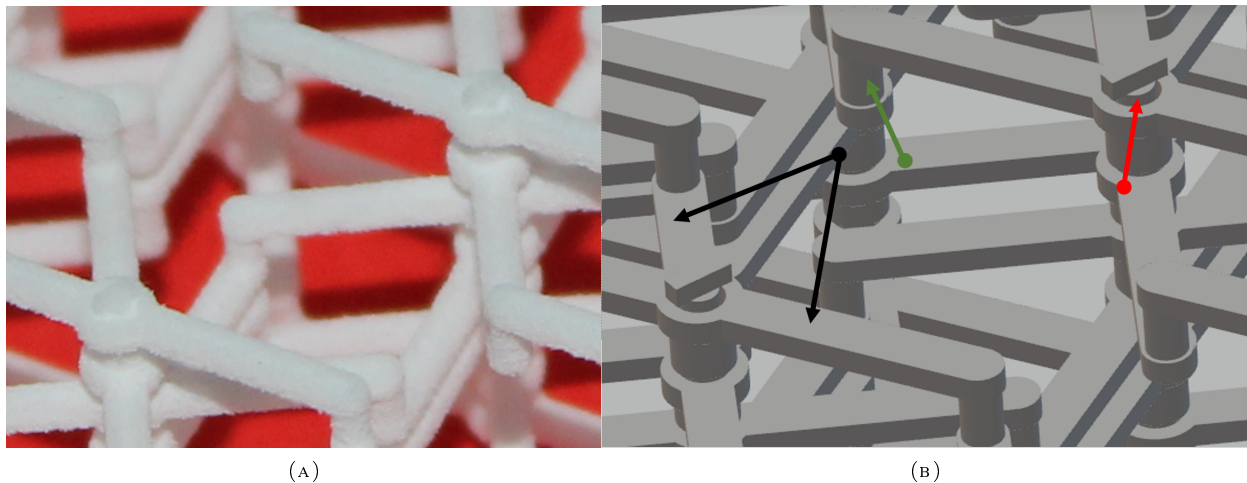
Manufactured specimen (A) and CAD design (B). Zoomed view of 1. monolithic slender elements corresponding – by means of bending and extension – to blue/red rotational springs and to the adjacent extensional springs of Fig. 2(c) (black arrows), 2. cylinders materialising – by means of torsion – the green rotational springs of Fig. 2(c) (green arrow), and 3. hinges connecting monolithic slender elements at middle points (red arrow).
